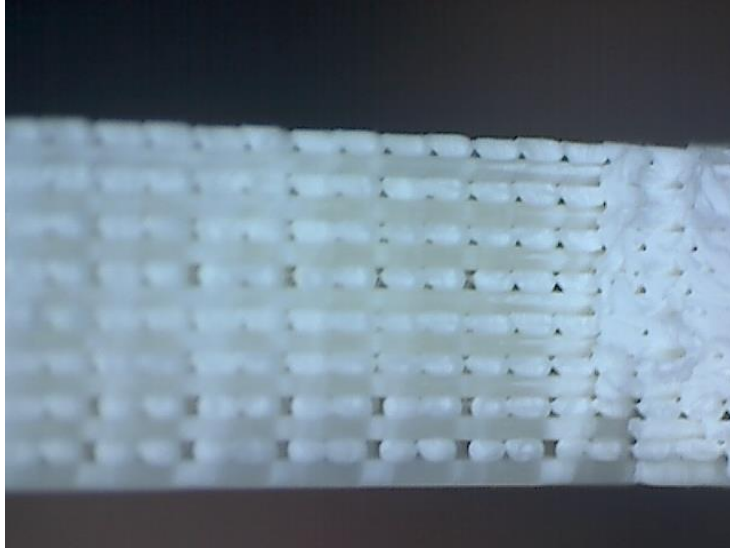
Fracture surface of a +/- 30° toolpath orientation discontinuous build ABS tensile specimen.
